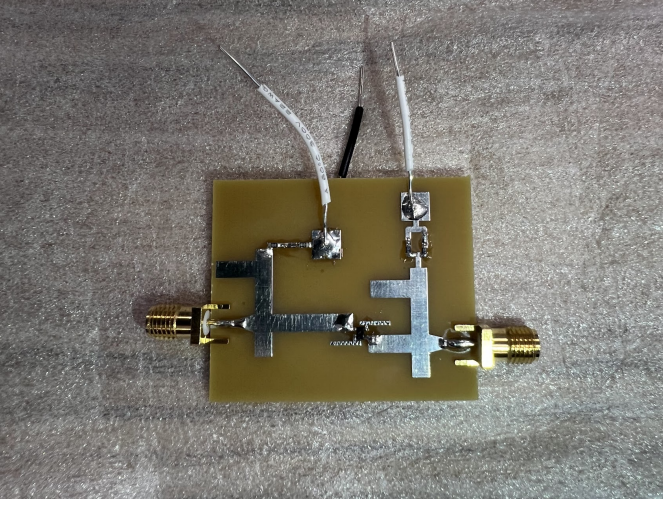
Fabricated PCB with all components soldered and ready for testing.
